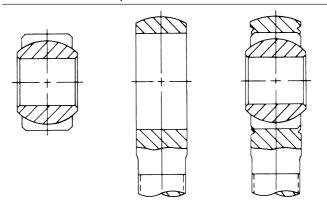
3- PIECE, HOUSING STAKED ROD END
